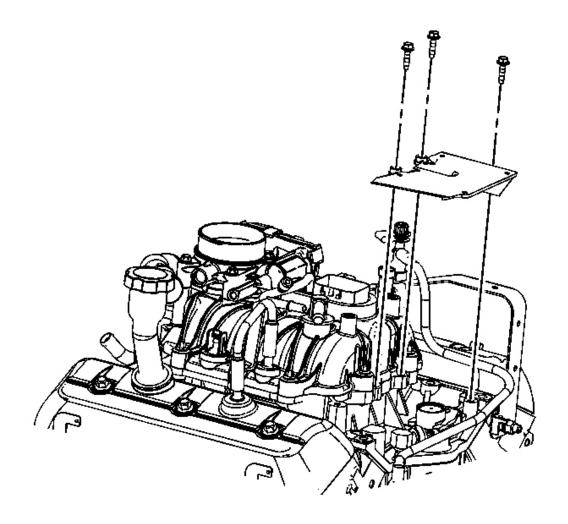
View Of Ignition Coil Bracket & Bolts Courtesy of GENERAL MOTORS CORP.
